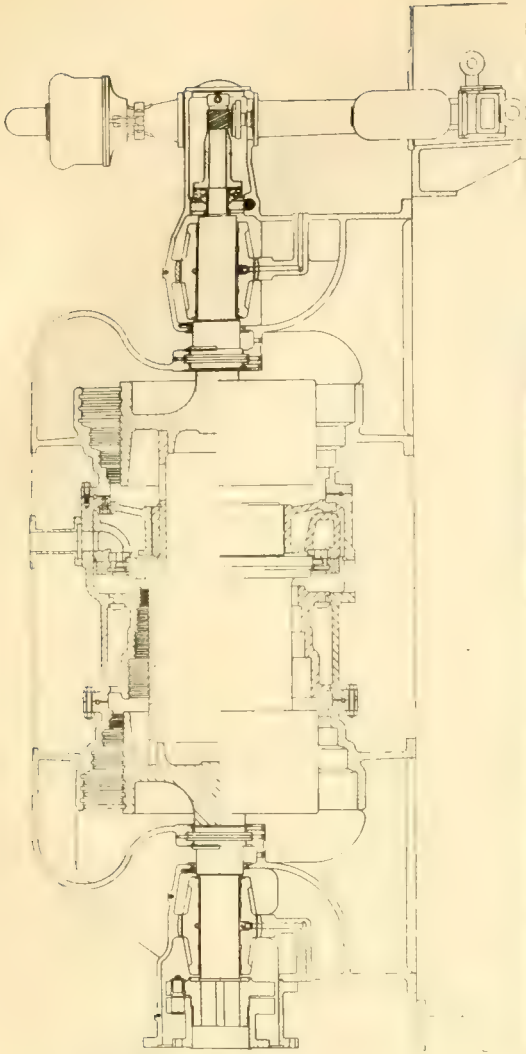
SECTION OF A 20000 KW, 25 CYCLE, 1500 R. P. M., SINGLE-CYLINDER TURBINE
